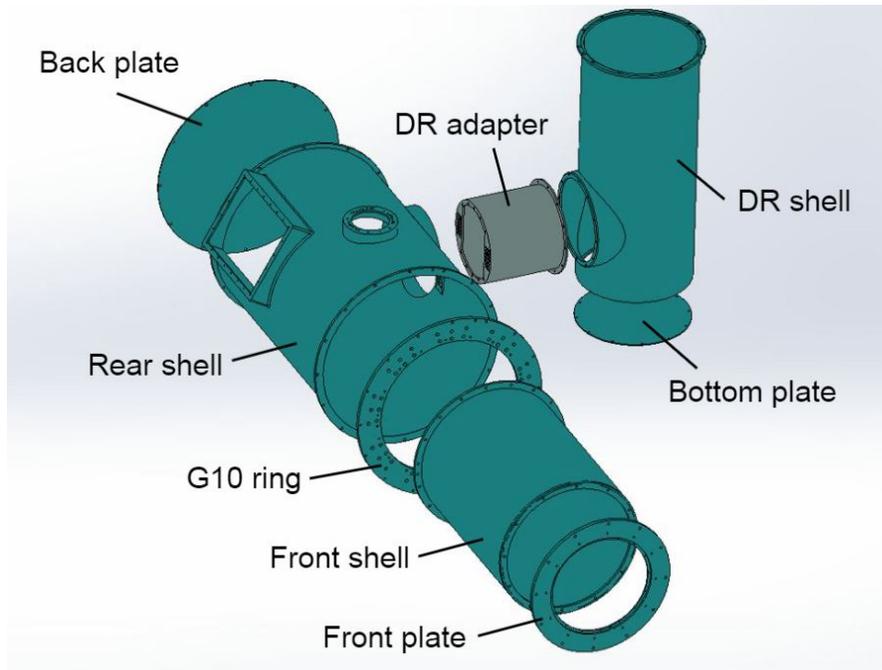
An exploded view of the 40 K Mod-Cam shells and plates. All are fabricated of 6063-T5 Al except for the DR shell bottom plate. The front plate mounts a filter stack including double-sided infrared blockers and an alumina filter. The front and rear shells mount to the G10 ring which supports the 40 K main shells from the 300 K shell and the 4 K shells from the 40 K shells (Figure 2.9). The rear shell includes interfaces for readout plates (rectangular cutout), a pulse tube 40 K thermal connection (top cutout), and the 40 K DR adapter and potential thermal connection. The 40 K DR adapter is mounted onto the DR shell, which is mounted on the 40 K shell of the Bluefors DR. When the DR shells are connected to the main shells, the 40 K DR adapter floats in the side cutout of the rear shell, and its position is offset due to predicted thermal contractions in order to be centered when cold (Section 2.3.3).
